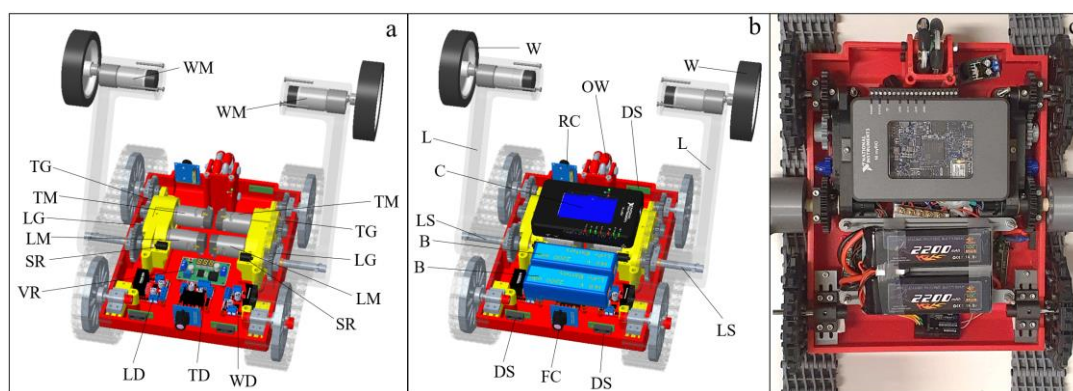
Internal layout of the robot: upper layer (a), lower layer (b), internal view of the prototype (c).
